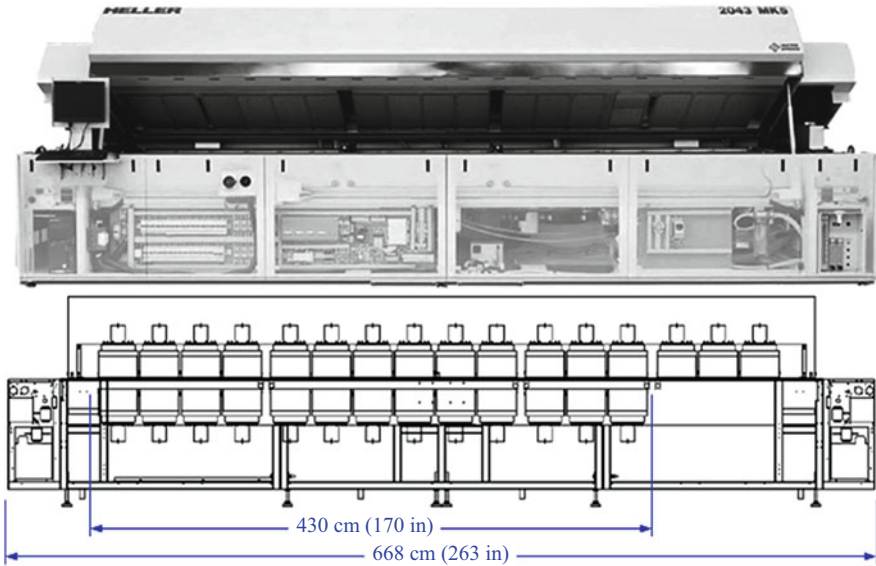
Front view and configuration of a 13 + 3 zone forced convection solder reflow oven
